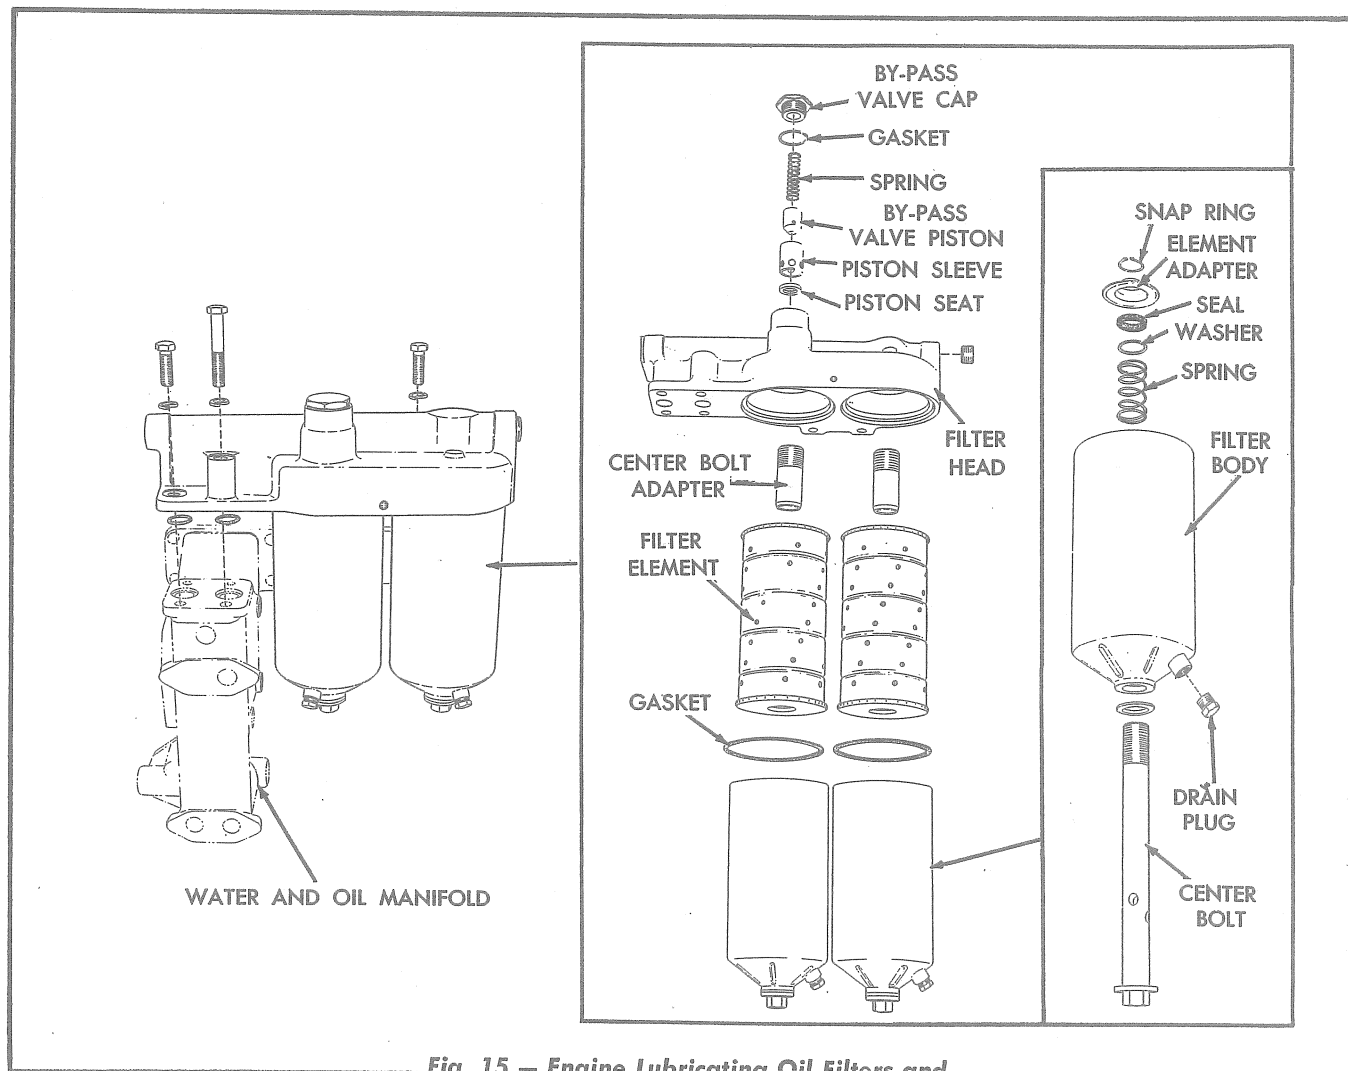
Engine Lubricating Oil Filters and By-Pass Valve Assembly Details (Tractors Serial No. 4001 and Above)
